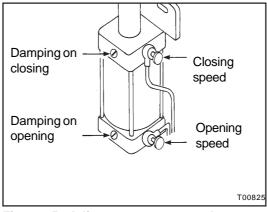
Adjustment screws on door cylinder (Protective cover of cylinder removed)
